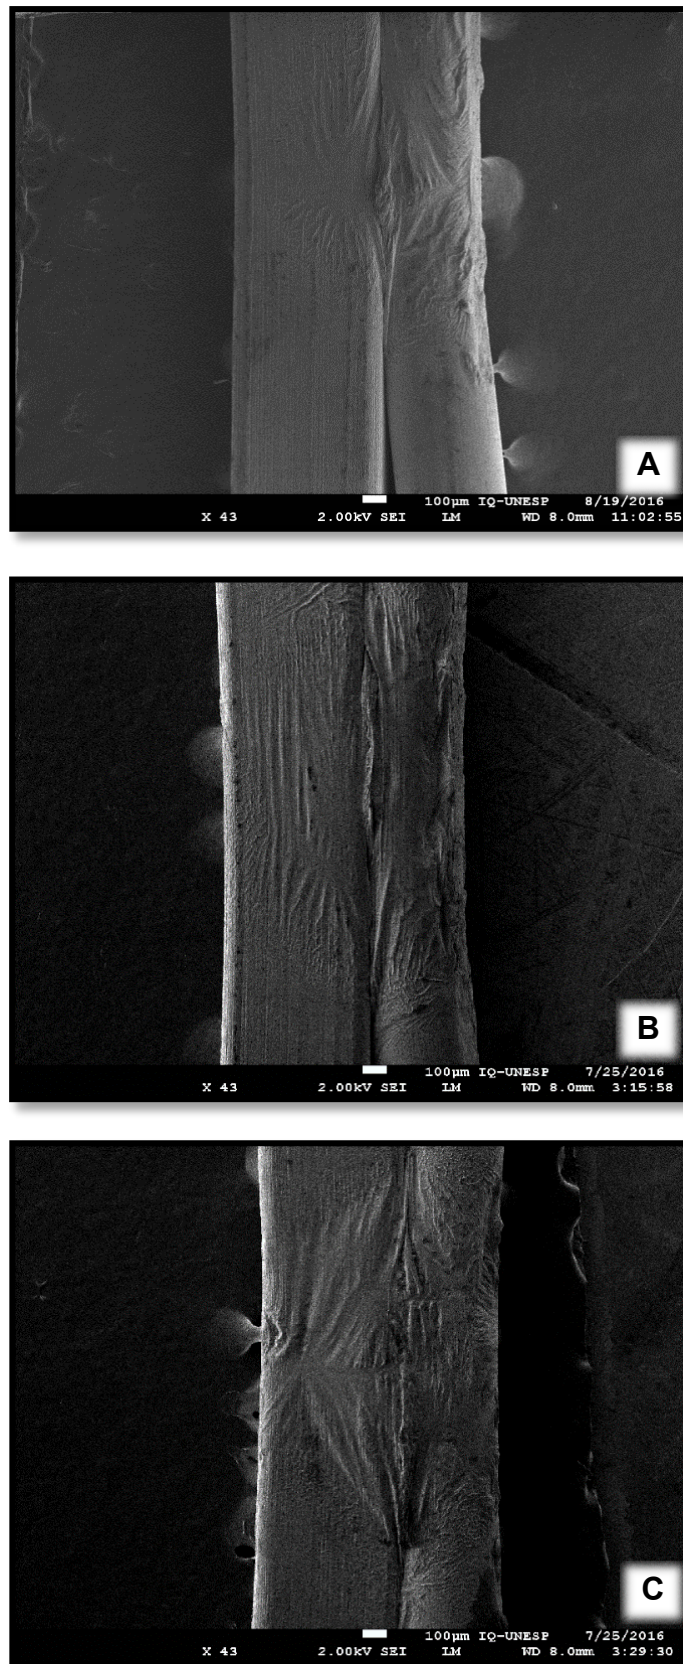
Scanning electron microscopy with a field emission beam and 43 times magnification of the electrical spot welds carried out on the GII wires. A. Welds with power level 3.75; B. Welds with power level 4 and C. Welds with power level 4.25.
